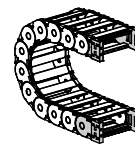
Fig. A The chain can be fixed frontally, inner or outer radius. (Fig A)
